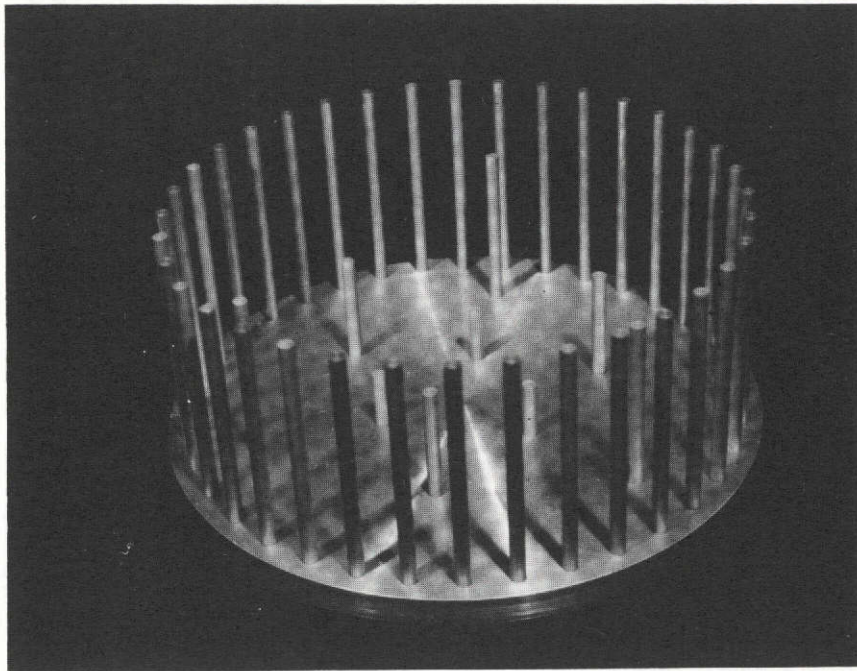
Type 3 Slinger Assembly (GESK56198-888)
